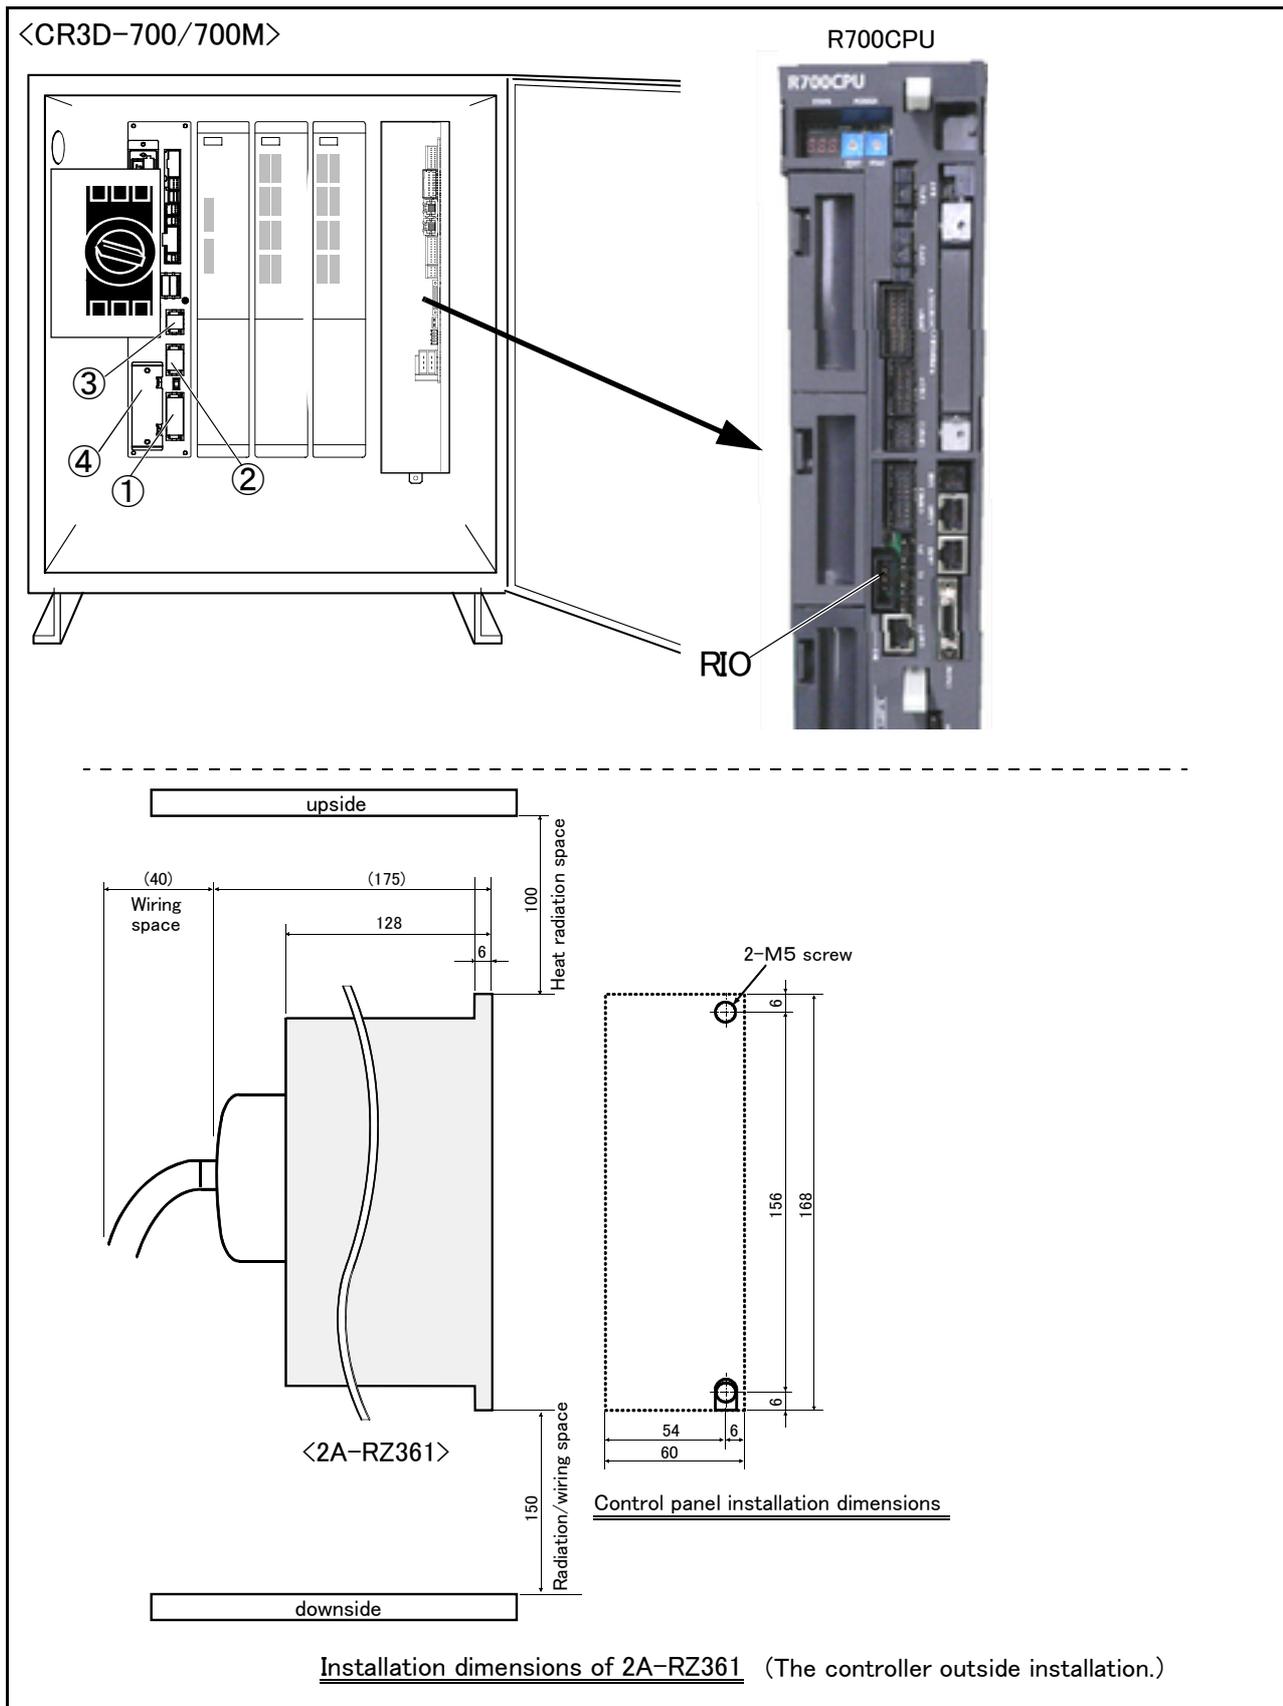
Installing the parallel I/O unit (CR3D-700/700M)
